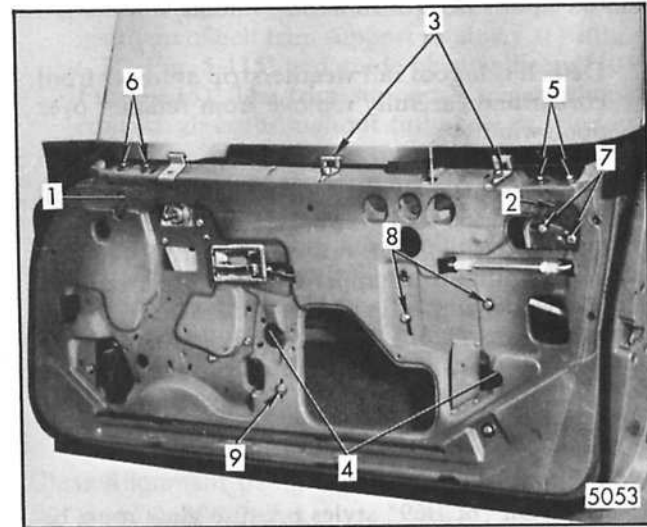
Window Removal and Adjustment - "F" Styles
